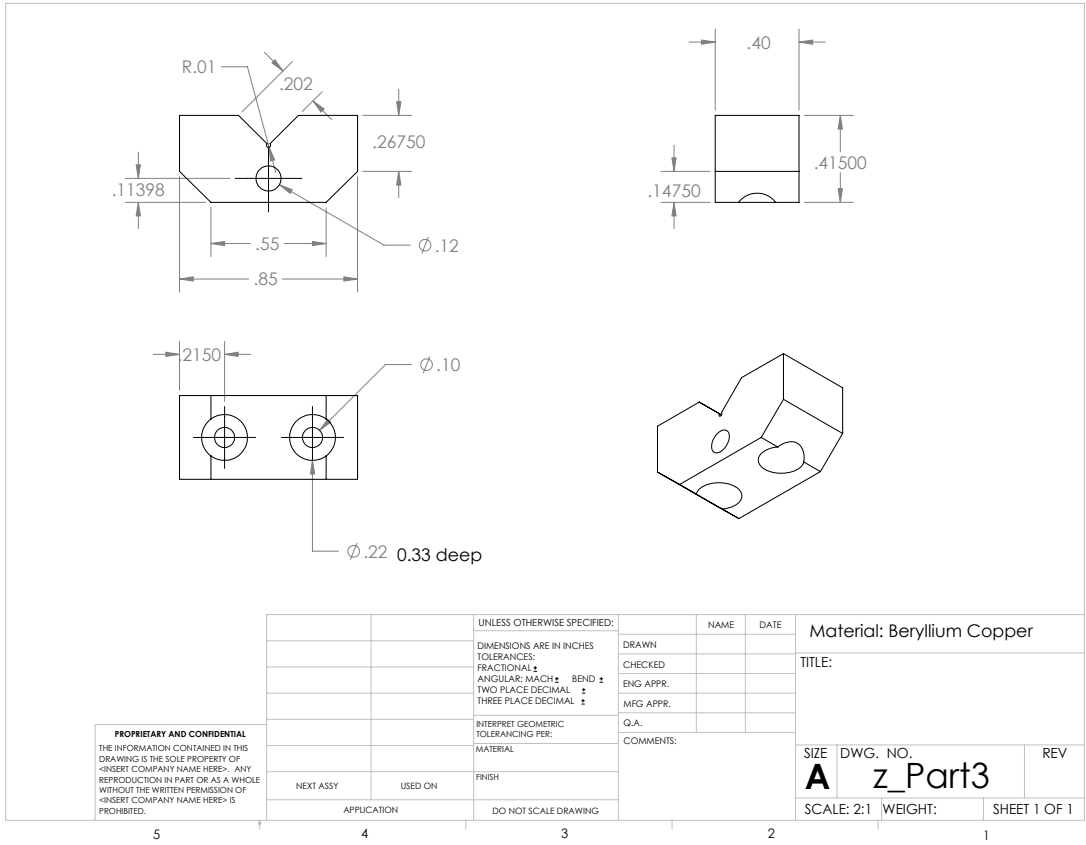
Stage Clamp 1: One side of the clamp element that produces the pressure necessary to create the friction needed for the slip-grip motion. This side has through holes where screws pass through, threading into the other clamp piece.
